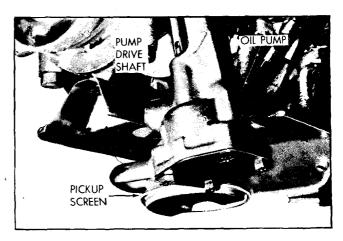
Oil Pump and Oil Pump Drive Shaft
